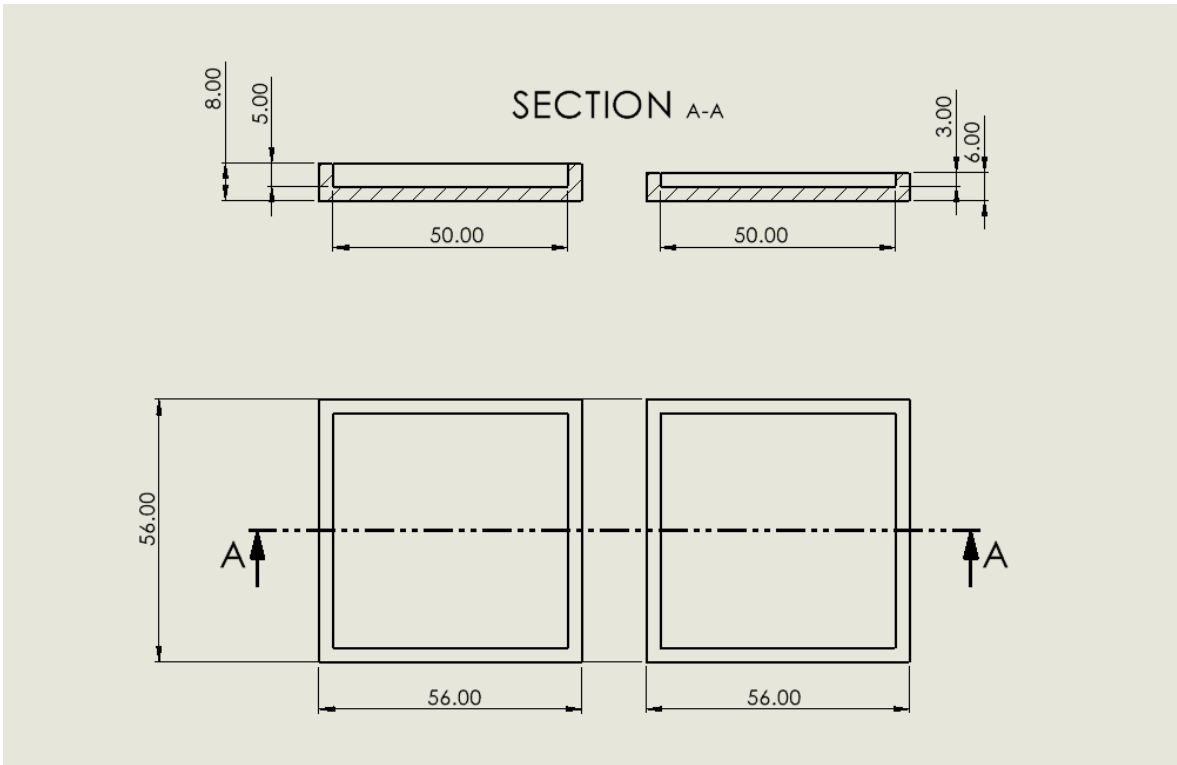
Designs of the molds, all dimensions are given in millimeters
